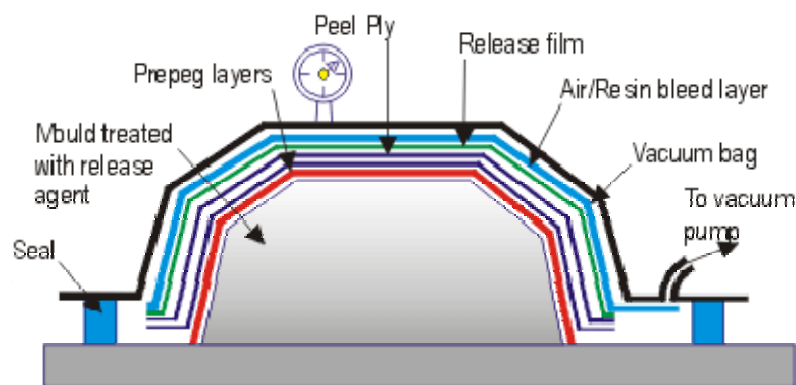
Vacuum Bag Molding Process (Justin Furness, 1998)
